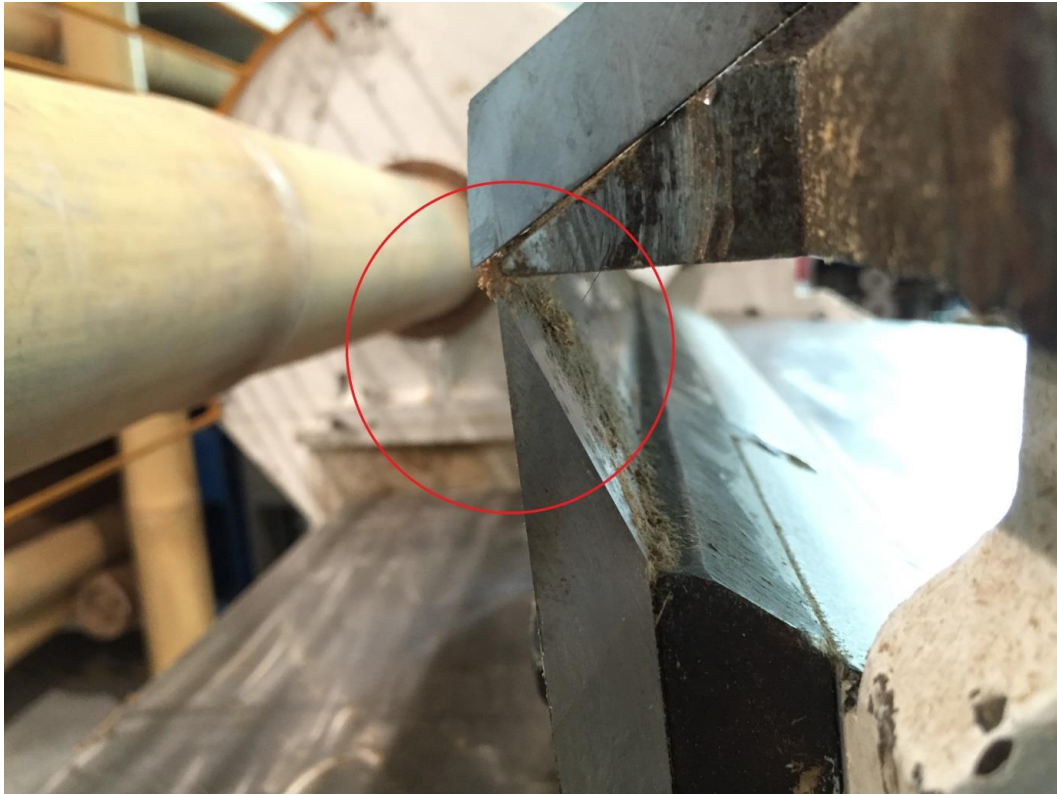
Bamboo section fixed to the set-up of a peeling machine
